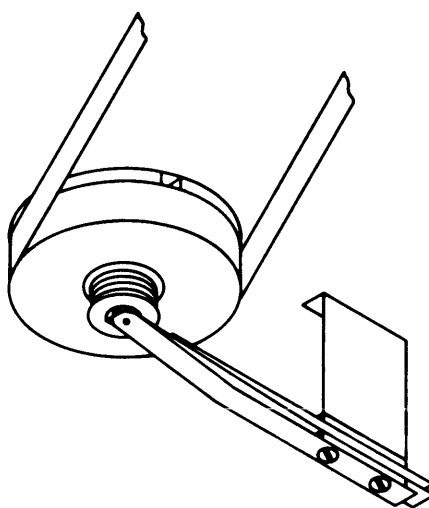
SPINDLE DRIVE SYSTEM
